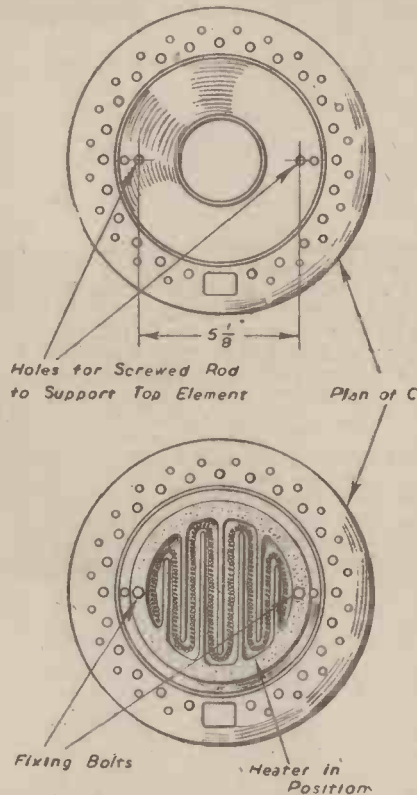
The section C to which the upper heater is fixed, as shown by the lower plan view.
